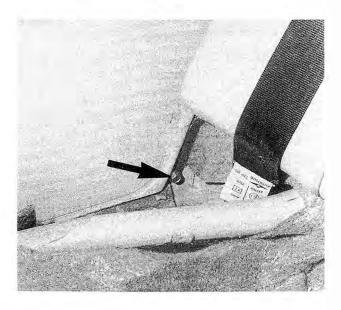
Rear seat backrest mounting bolt (arrow). There is one on each side. On some models, bolts may be at center of backrest.
